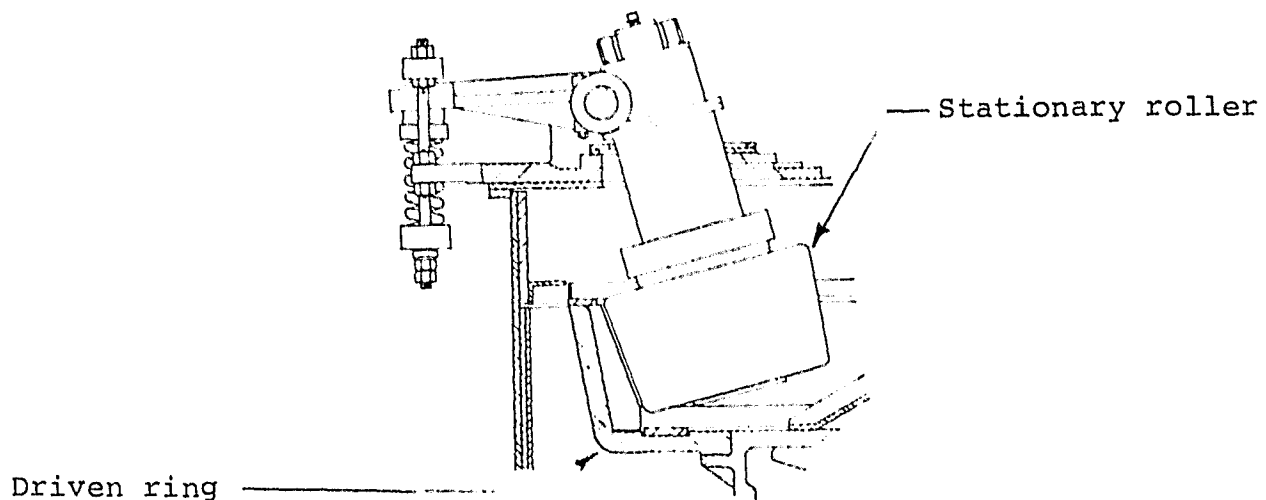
Roller mill with stationary roller and driven ring (ref. 3-5).
